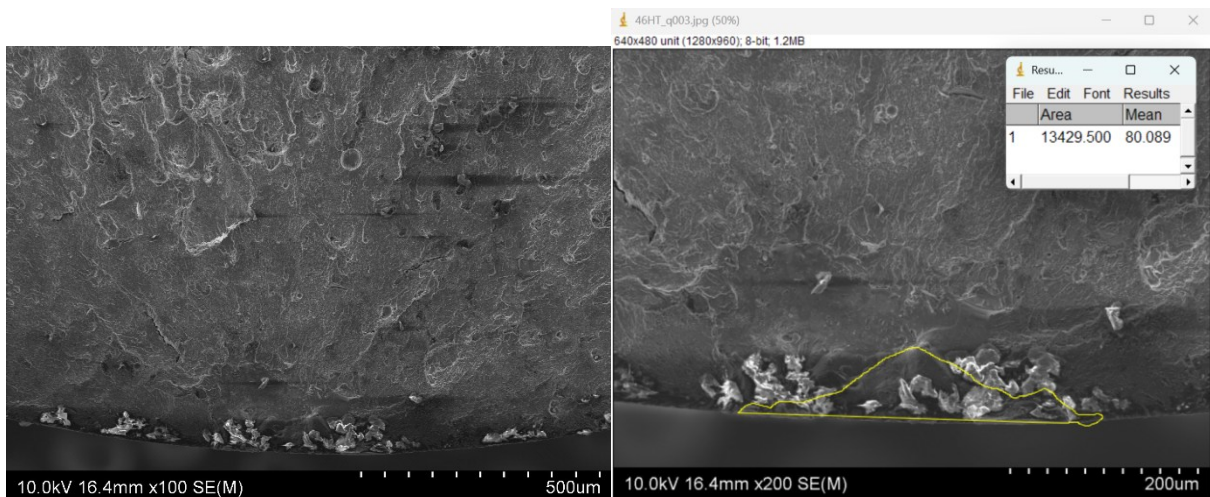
Fracture surface of sample CD_LBD-AB-7 a) x100, b) x500.
